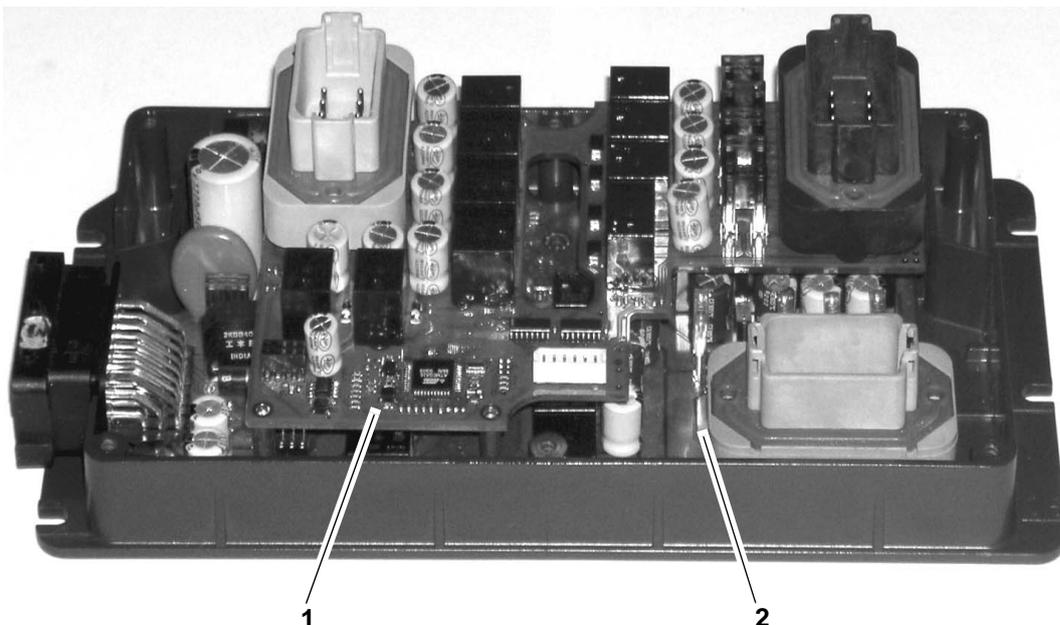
A Platform 2 ECM configuration, with PCB 2 mounted above PCB 1
